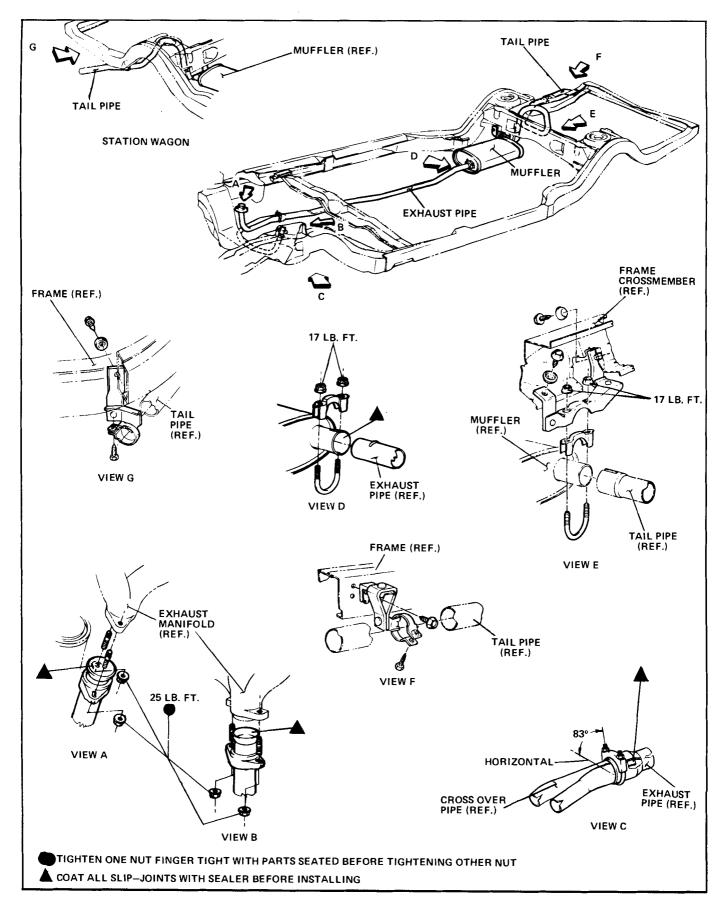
Installation of V-8 Single Exhaust System (A Series)
